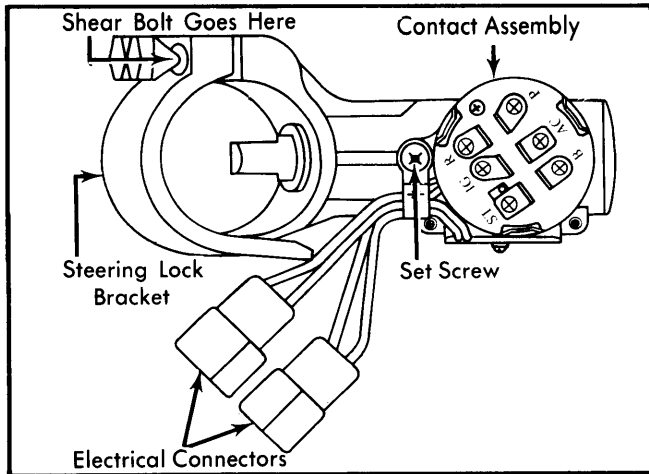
Exploded View of Ignition Switch Assembly (Except B2000)
